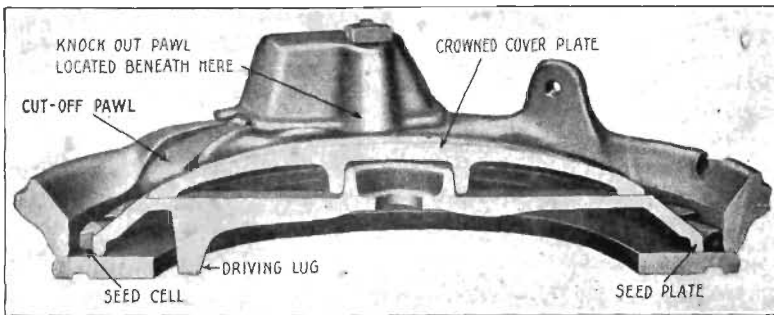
Cross-section of hopper bottom, plate, and cover showing cells and cut-off pawl.
